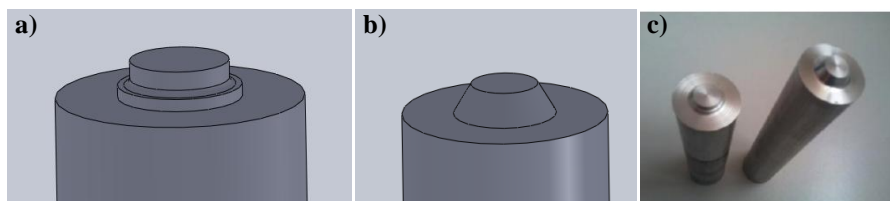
Tools used for the second stage of development: a) tool with two layers (tool 1), b) conic tool (tool 2) and c) image of the produced tool.
